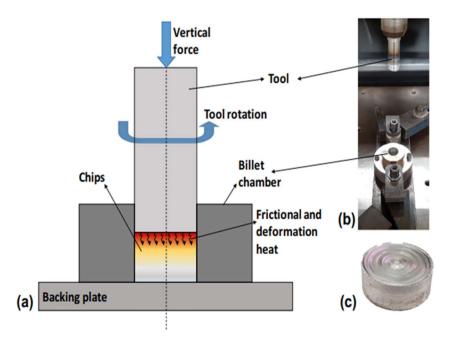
a Sketch of the process, b utilized fixture, and c consolidated billet [38]
